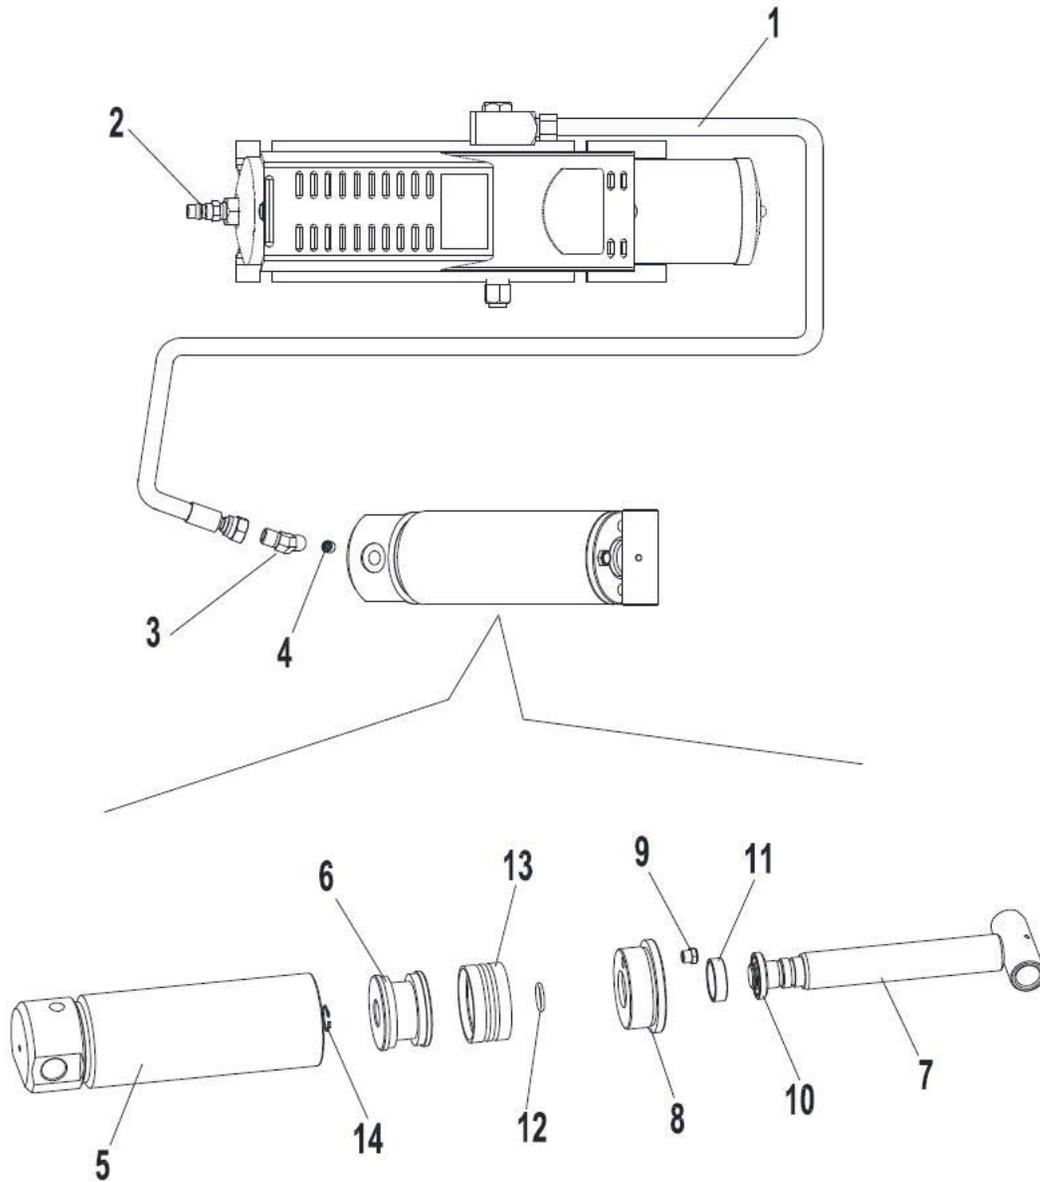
Jack Hydraulic Cylinder Unit And Line
